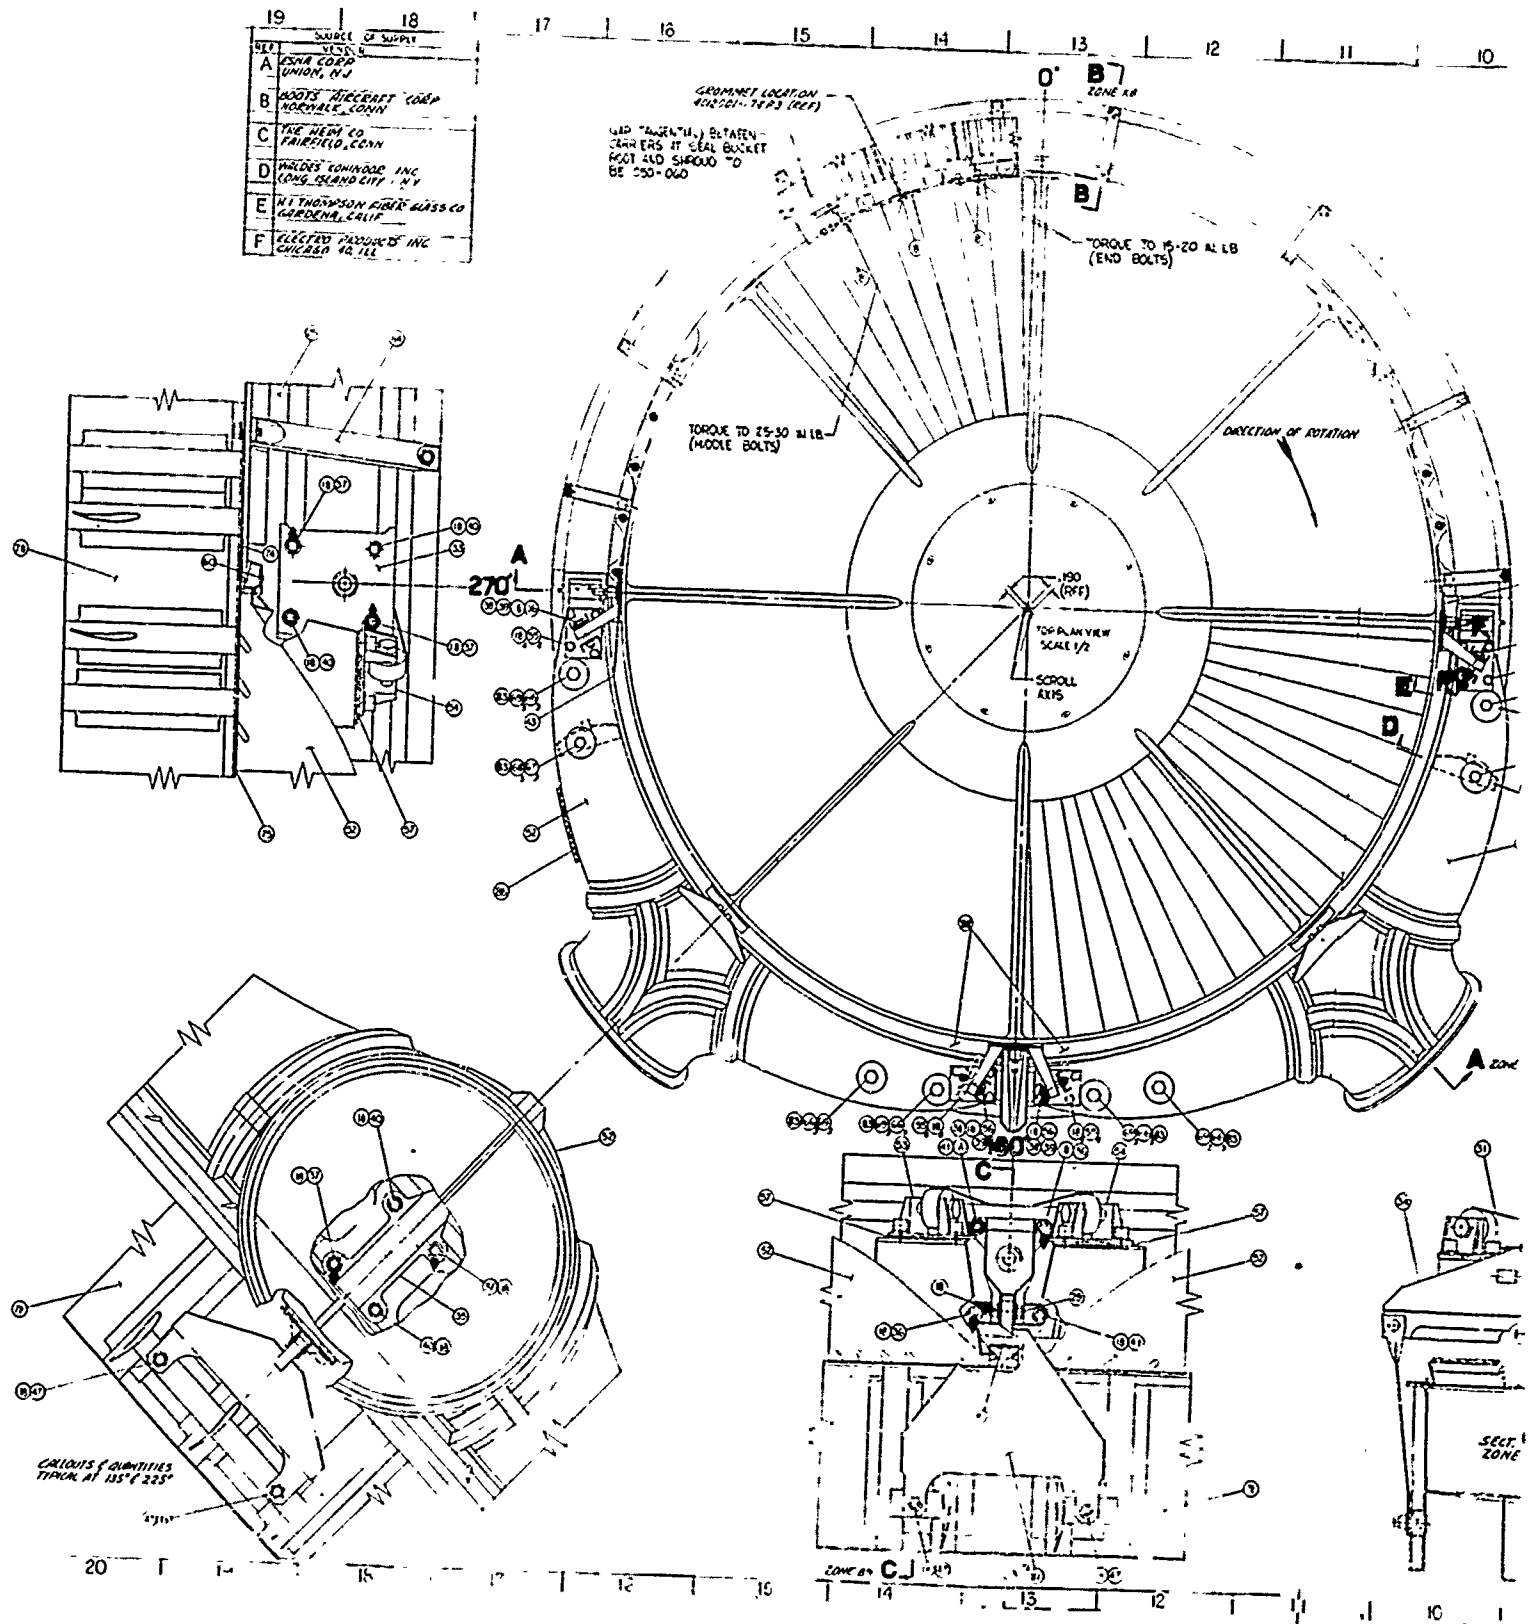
CROSS SECTION DRAWING X376 PIT
